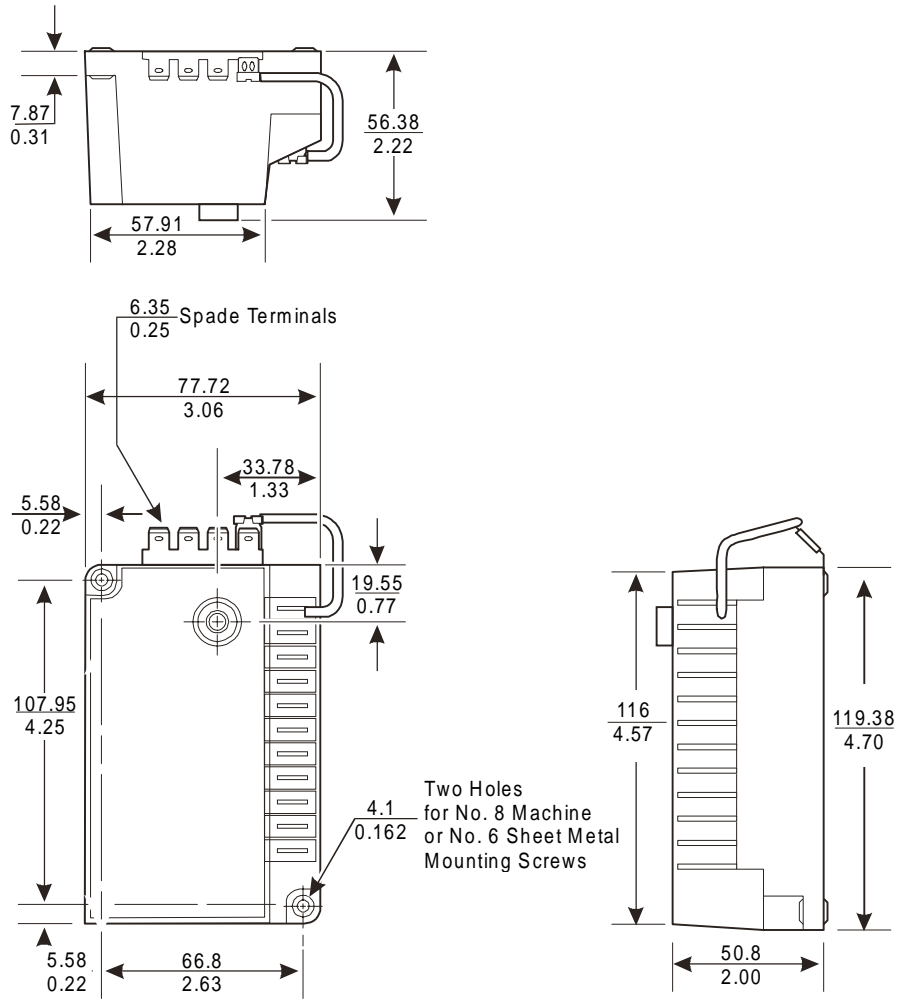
G67(A and B) Mounting Dimensions, mm (in.)
